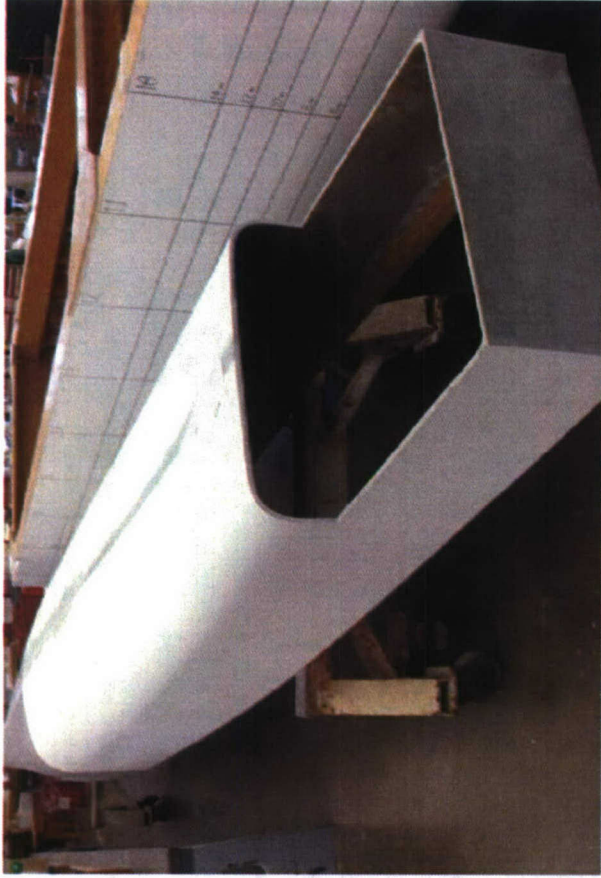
MxWJ Model 5662-1 construction and equipment installation (Feb-June 2007)
